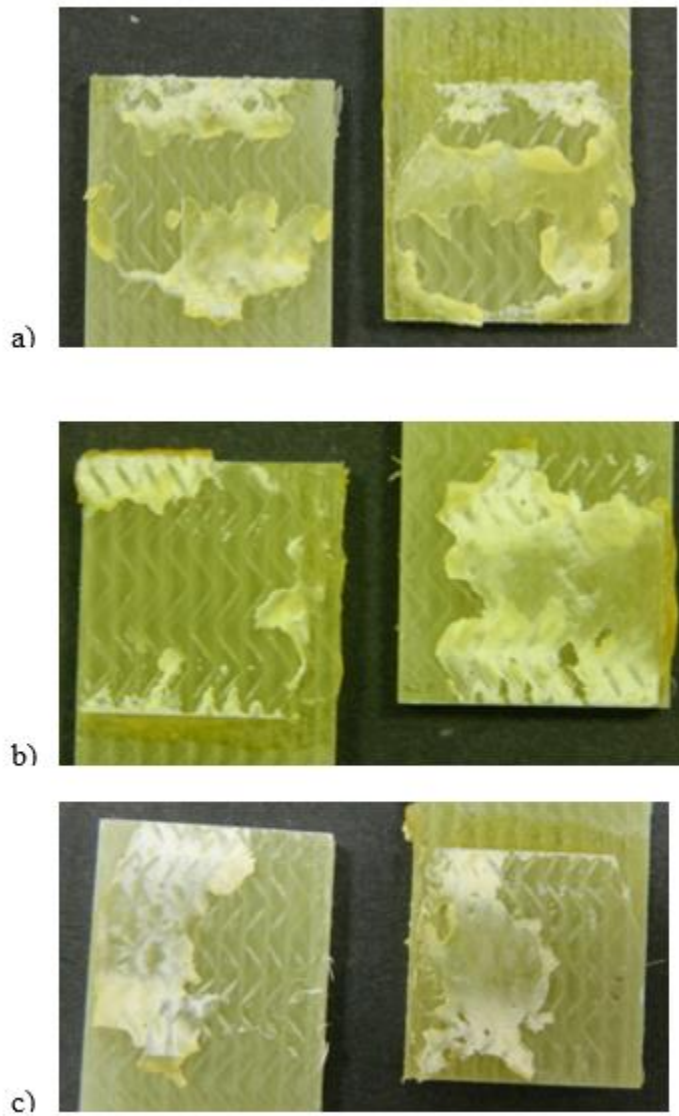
MMA adhesive fracture surfaces of control specimens tested a) 2, b) 9, and c) 33 days after manufacture.
